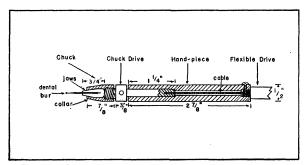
Chuck and hand-piece. Section showing detail of chuck construction, chuck drive assembly and method of anchoring flexible drive.
